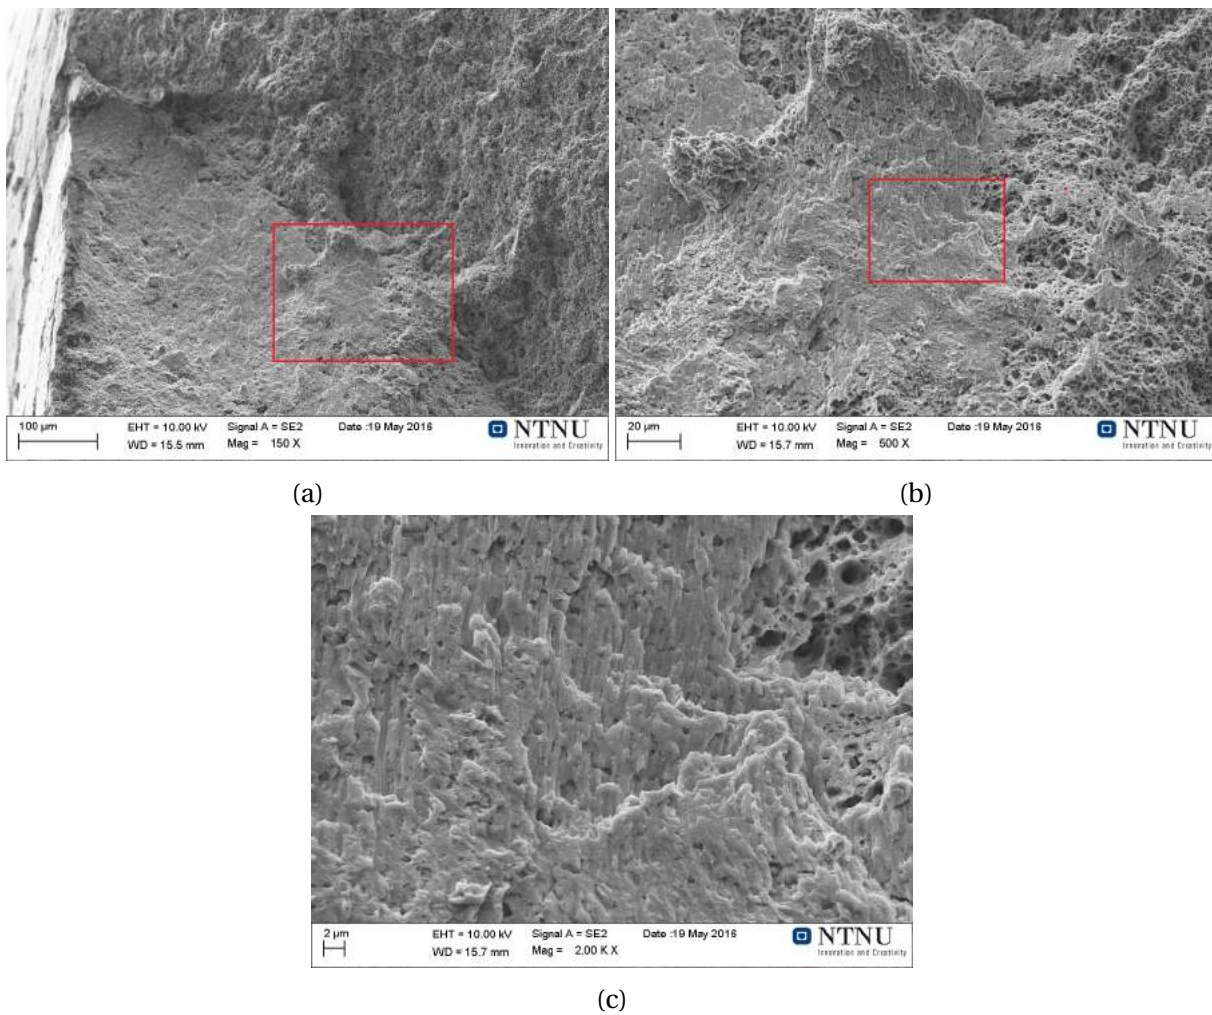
Fracture surface of Al-5%Mg screw extruded machined granulates.
